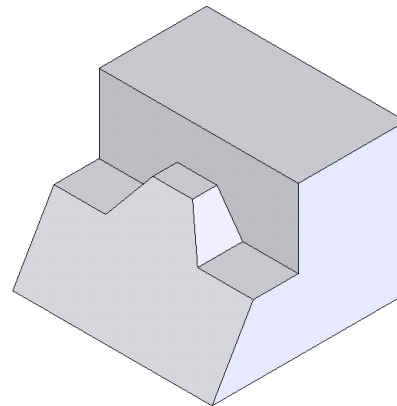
Step draft created with the Perpendicular steps radio button selected
